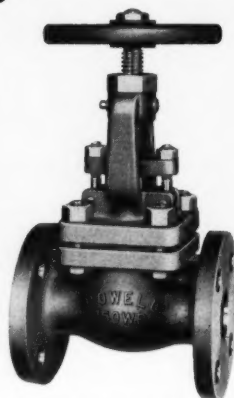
150-pound O. S. & Y. Globe Valve. Stem is threaded and guided through a bushing screwed into upper yoke which has a compression lubricant fitting. Seat and plug type disc easily reground if necessary. Conforms to latest standards. Available in a large selection of corrosion-resisting metals and alloys, with bolts and nuts in stainless steel. Also with screwed ends.
